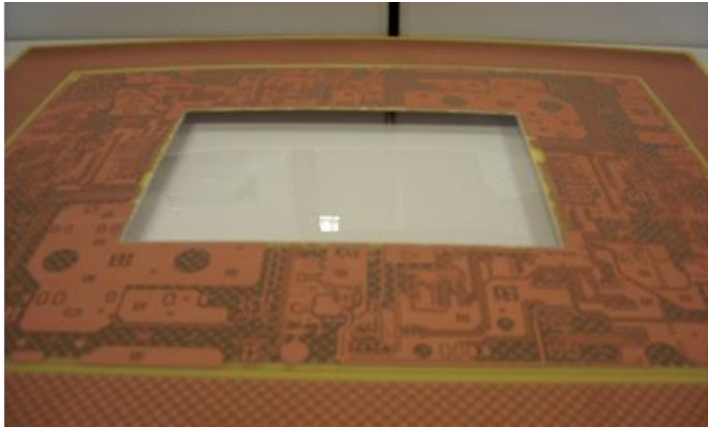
Glass foil laminated into PCB stack-up with conventional hot lamination technique shows bulging (Source: ILFA GmbH)
